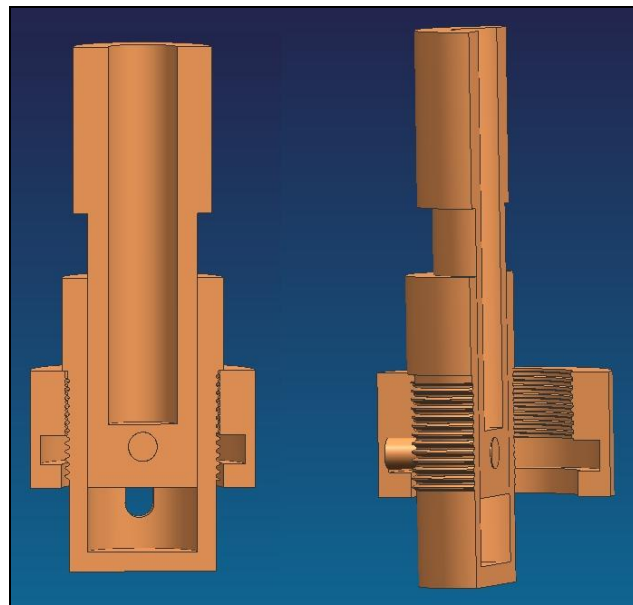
Cutaway view showing the thread and channel that allows the piece to move
